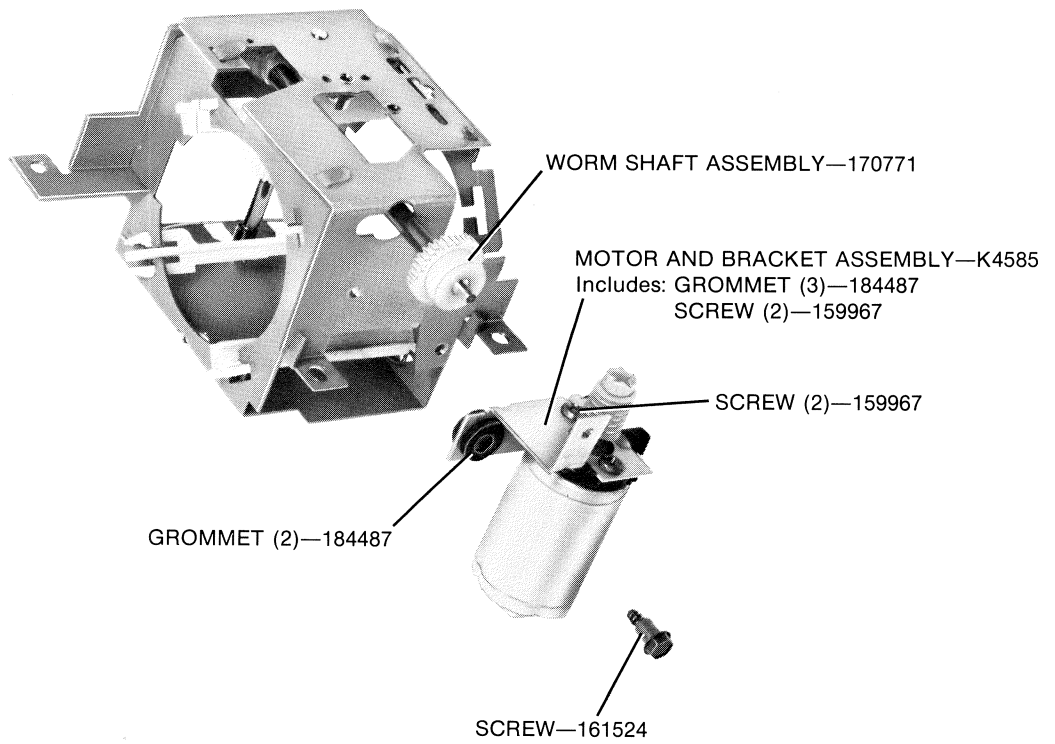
750, 750H, 800, and 800H PROJECTORS
